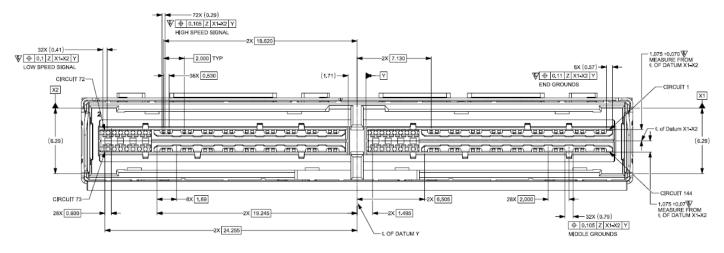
Dual-Bay Top View of Fixed-Side Connector
